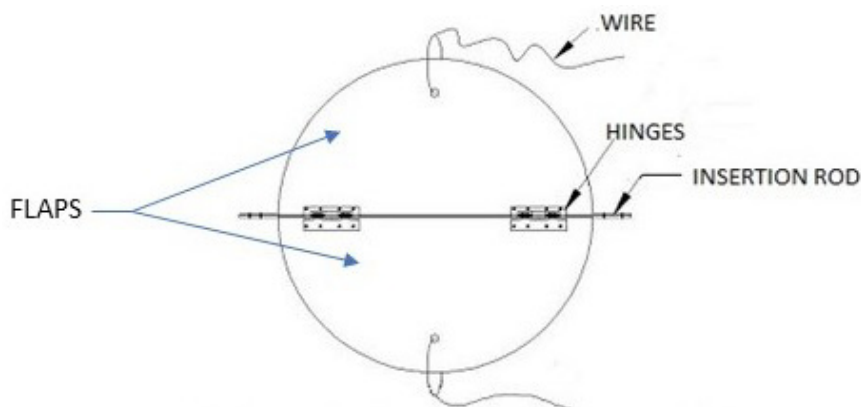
FLAP ASSEMBLY FOR TURBO VENTILATOR
